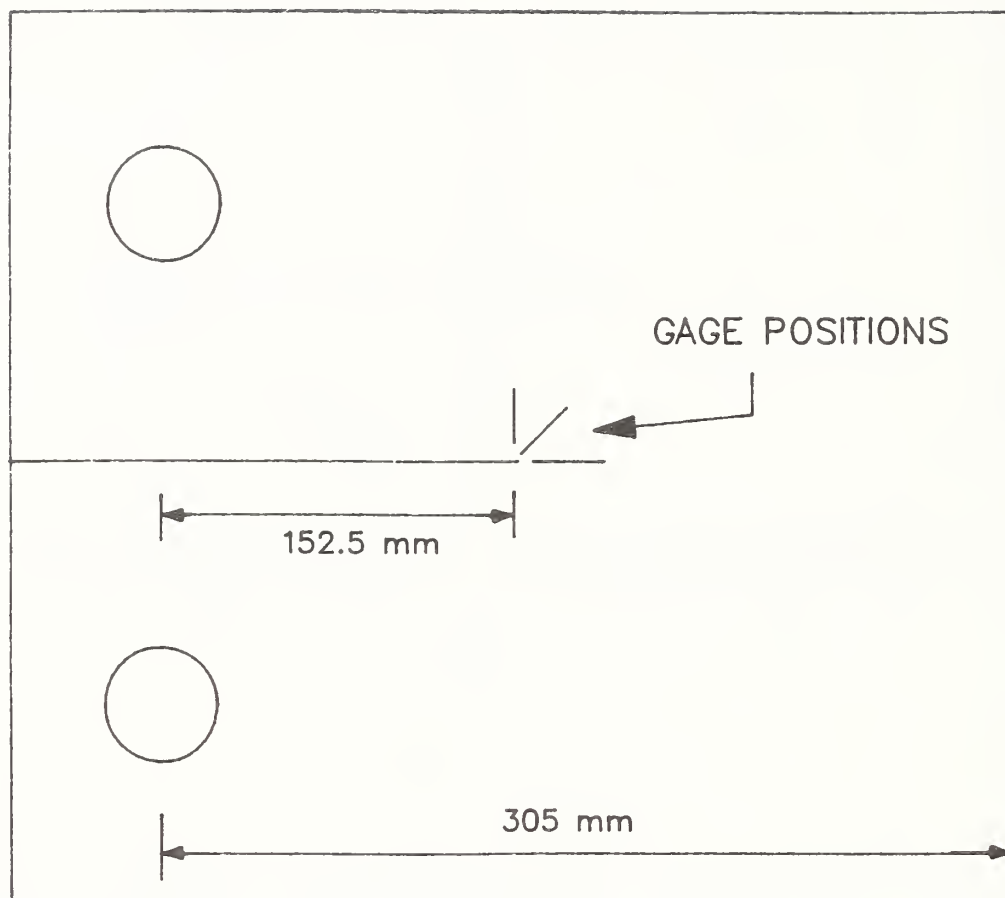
Geometry of the Al 6061-T6 compact specimen.
